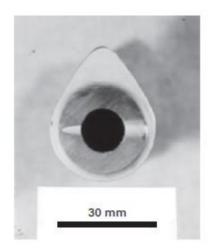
Camshaft cross-section at the position of an oil hole which is perpendicular to the central hole. The holes supply oil to the journal bearing.
